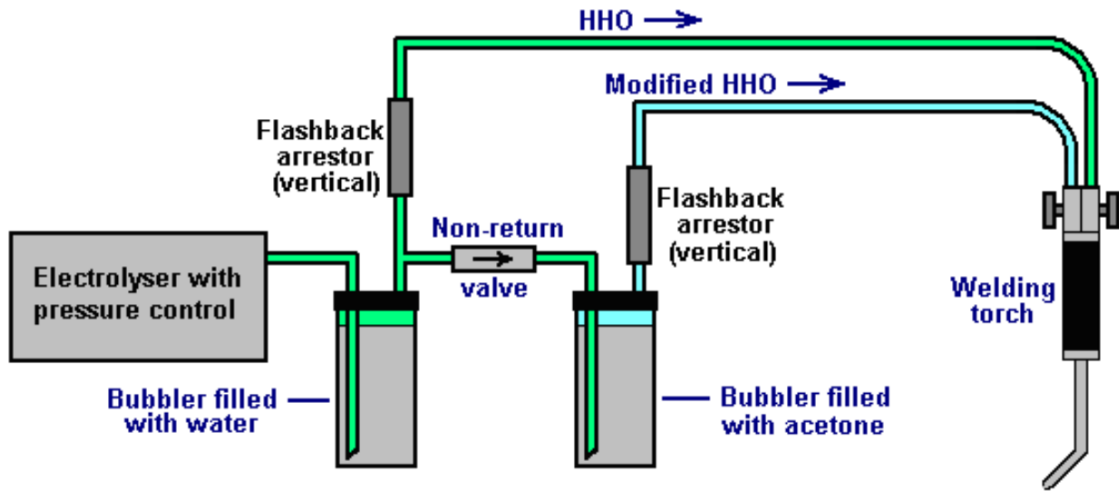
Schematic of David Quirey's HHO welder. When using the system for welding, David uses the mains to power the electrolyser.
